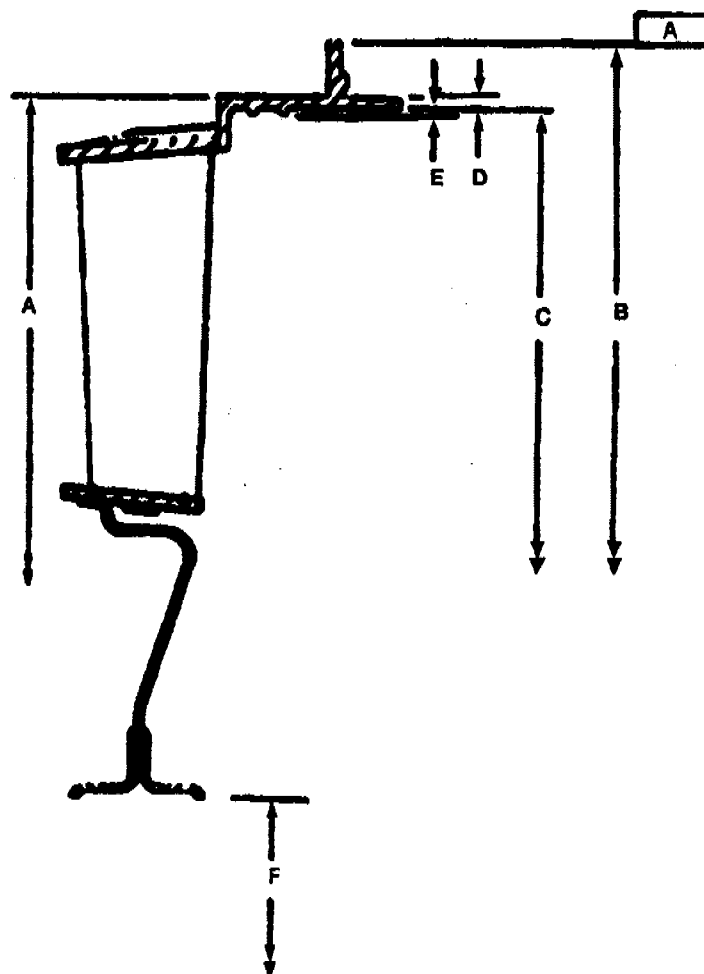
Second Stage Power Turbine Nozzle Assembly Inspection Area (Sheet 2 of 2).
